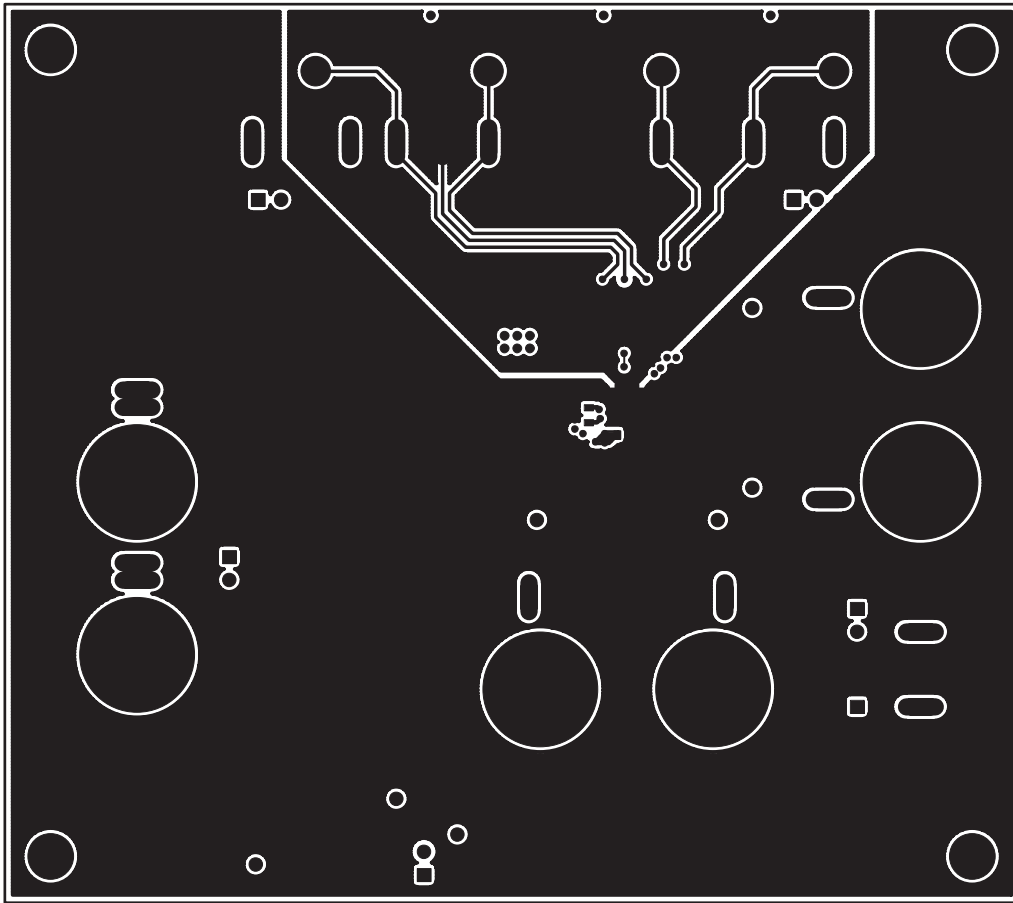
MAX9791A EV Kit PCB Layout—Solder Side
